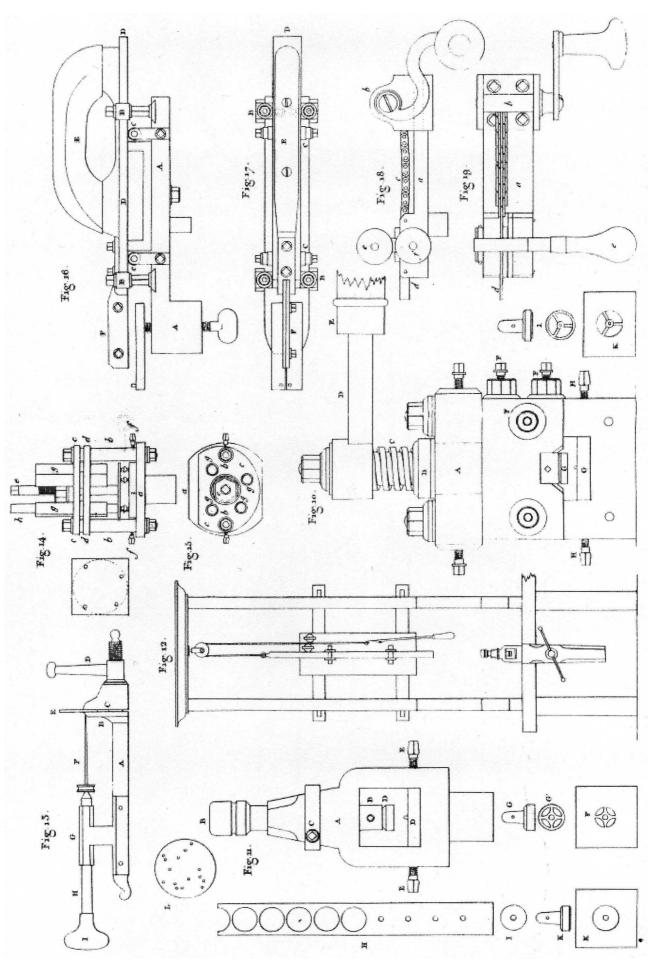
Small upright drilling machine with bow. It is placed in a vice.
